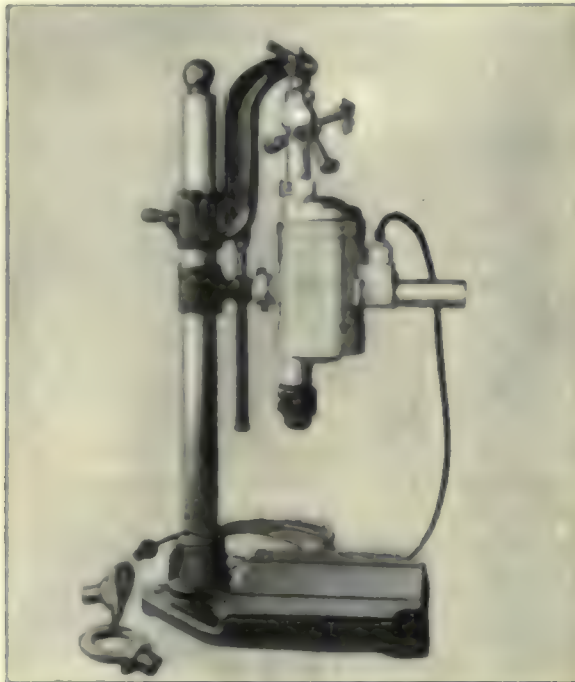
PARTS OF "MILLERETTE" ATTACHMENT
